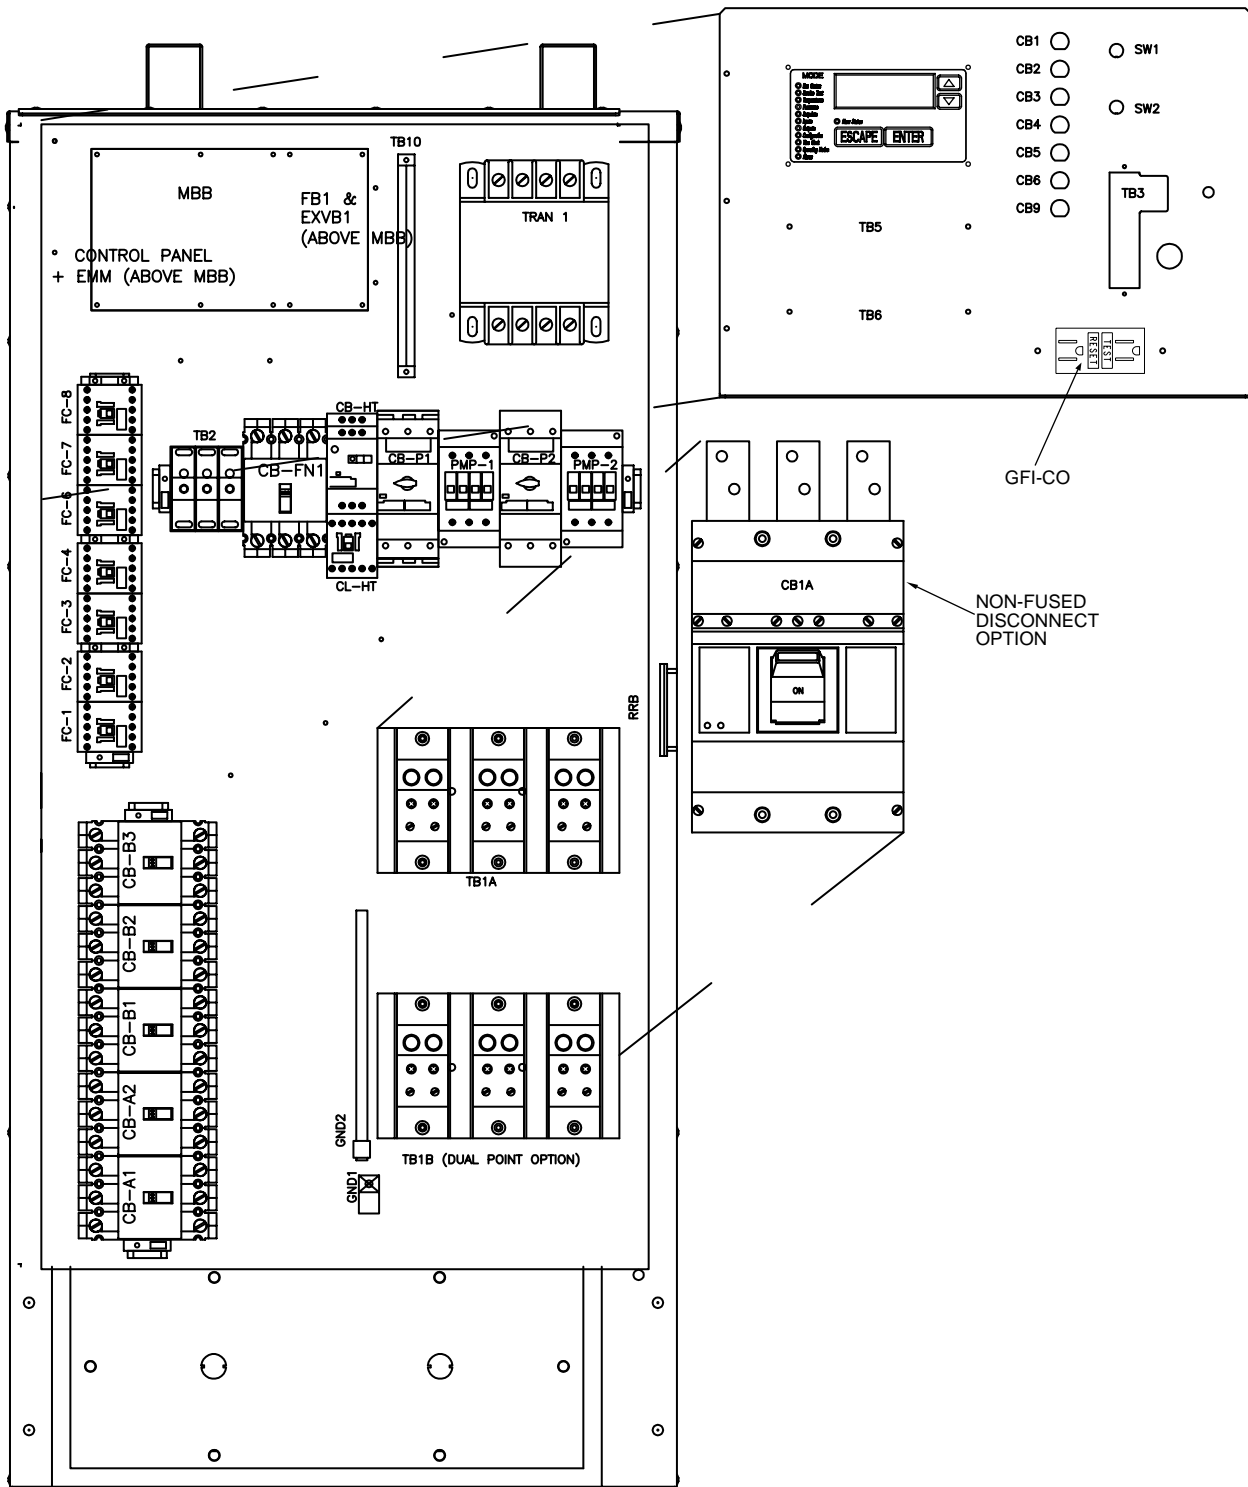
Component Arrangement, 30RB060-120, 380/460/575 V
